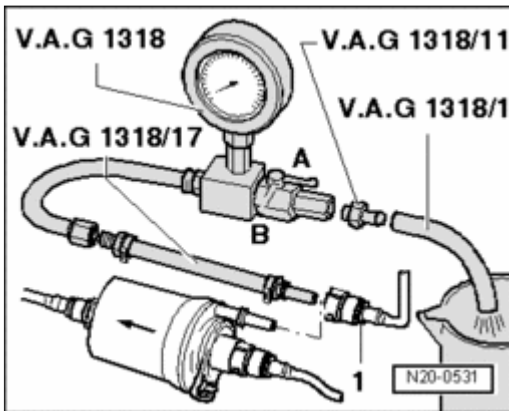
Connecting Pressure Gauge VAG 1318 With Adapters
